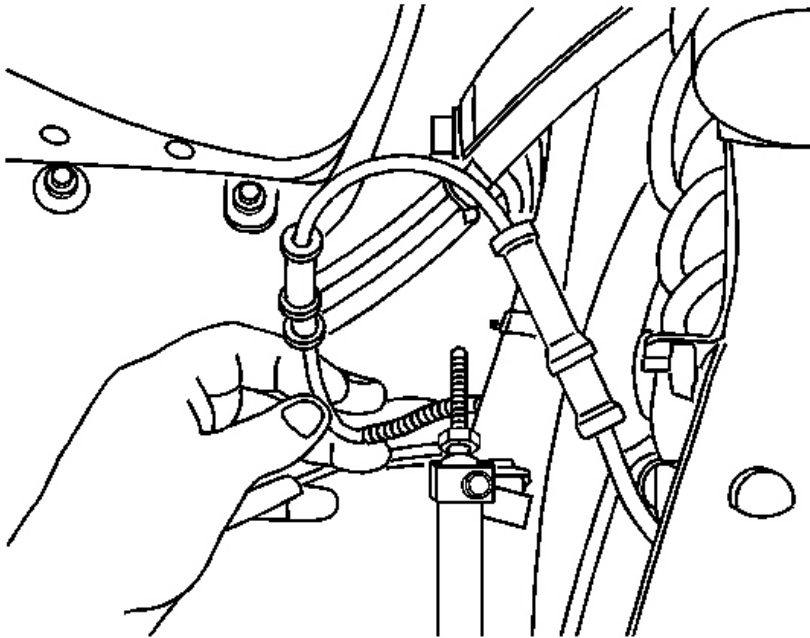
Identifying Wheel Speed Sensor Wiring Harness
